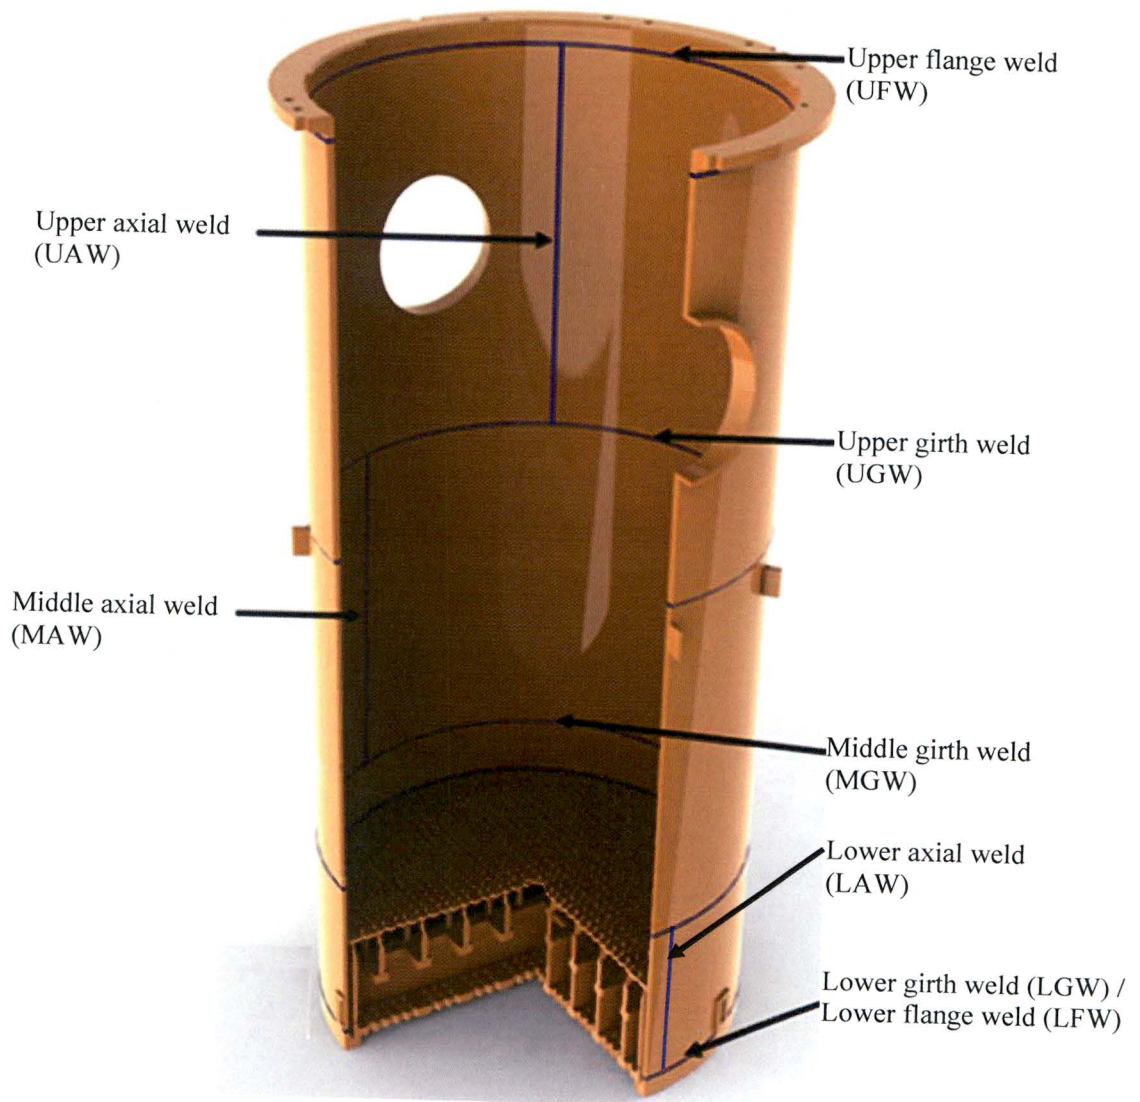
Example of CE Core Support Barrel Weld Identification
